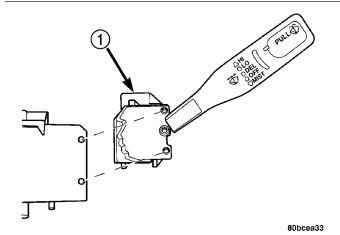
FRONT WIPER SWITCH - REMOVE/INSTALL
